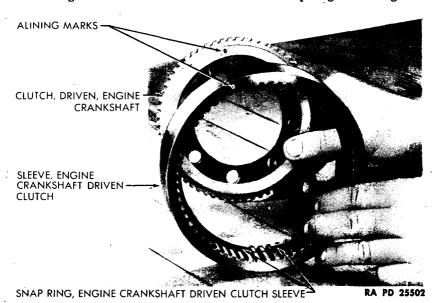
Installing Engine Crankshaft Driven Clutch In Sleeve
